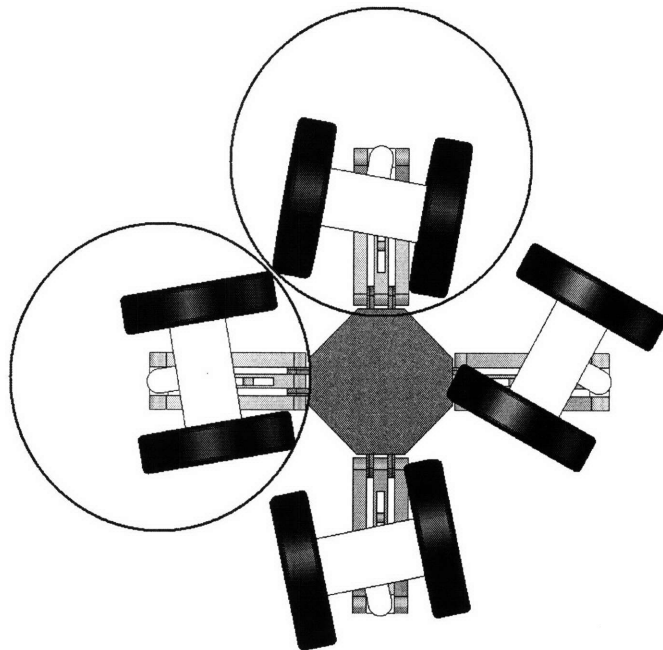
Bottom view of a point robot design. Note that the ASOC modules are the maximum size allowed without violating workspace constraints outlined in Section 3.1.1.
